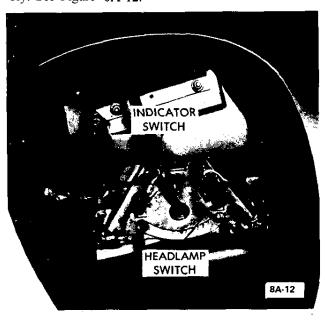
A-1 2 Headlamp and Headlamp Indicator Switches
